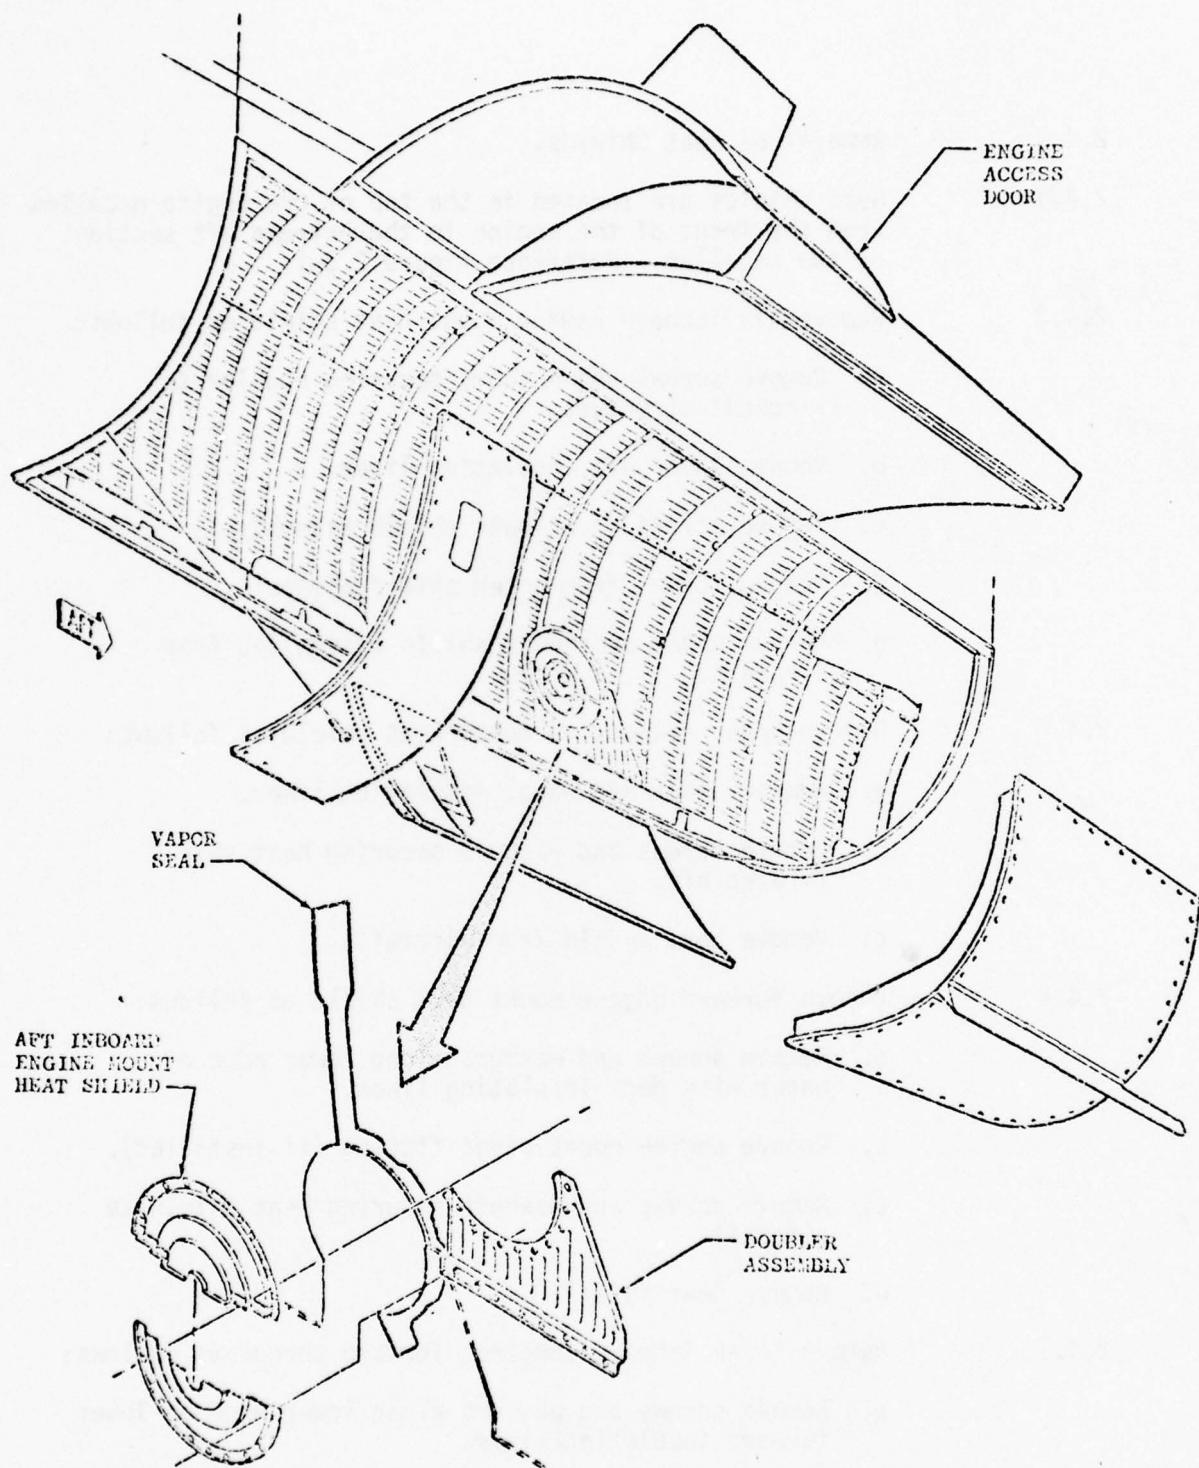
Engine Insulating Liners, Heat Shields and Vapor Seals (Sheet 1)
